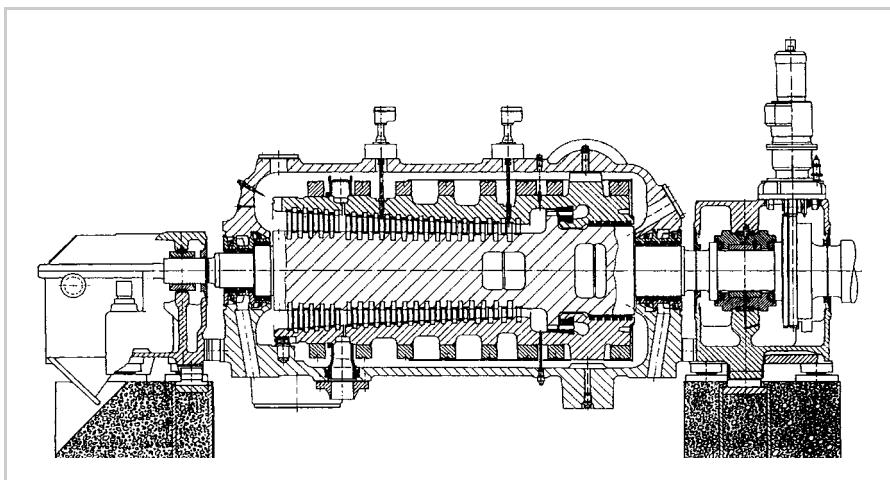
Double-casing steam turbine with shrink rings that hold the inner casing together. Relaxation of the shrink rings is reduced by cooling with exhaust steam. As the machine increases its output, the shrink rings exert an increasing pressure thanks to growing temperature difference between the steam inlet and outlet. The shrink rings are seated on heat-inhibiting segments which, with the help of shims, permit the original shrink fit to be restored after relaxation (ABB)
